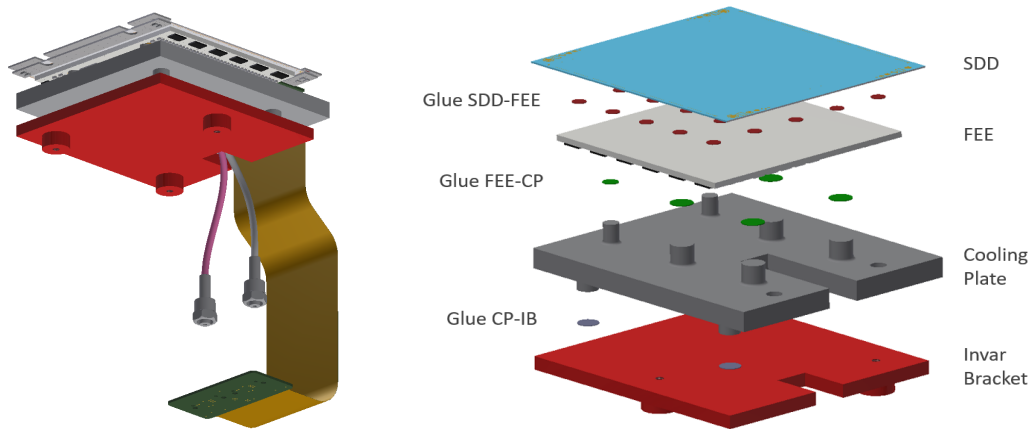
WFM detector assembly (DA). Left panel: layout of the detector assembly, with, from top to bottom, the FEE PCB (Printed Circuit board) including the ASICs and all the FEE components), the cooling plate (gray) and the Invar Bracket (red). The HV (high voltage) and MV (medium voltage) cables are also shown, as well as the flex-print to the BEE. Right panel: scheme of the four layers of the DA, with indication of the glue spots to assembly the corresponding layers one with each other.
